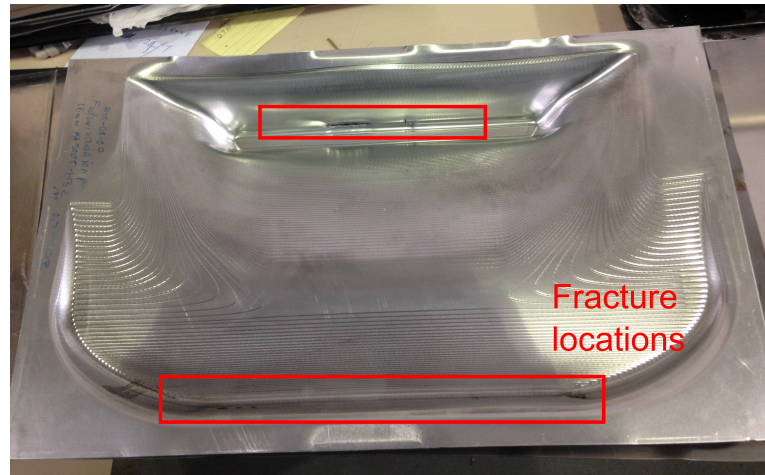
Photograph of a failed cushion pan part highlighting the fracture locations in red.
